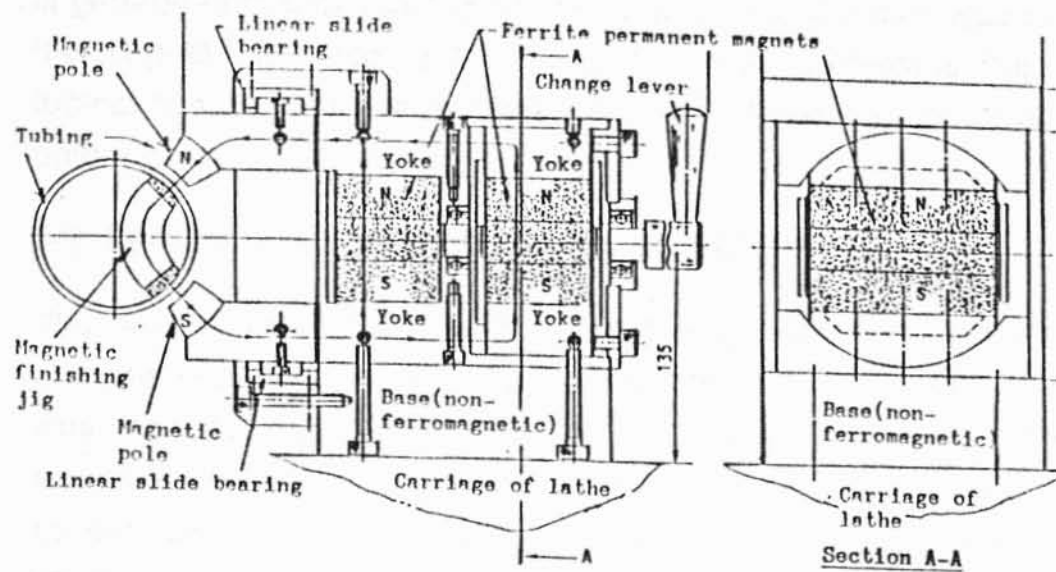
Assembly view of the magnetic finishing apparatus [Shinmura et al, 1993]
